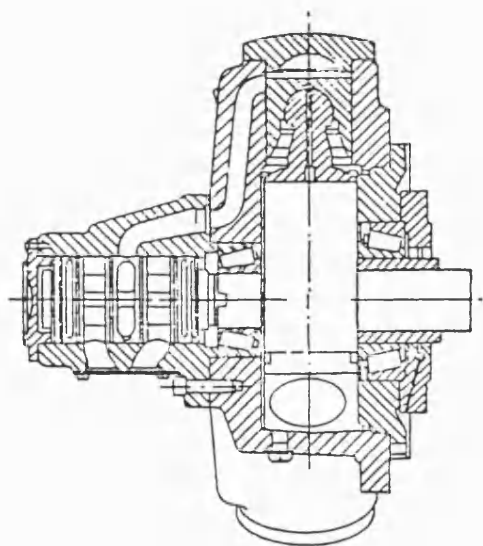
STAFFA RADIAL PISTON ECCENTRIC MOTOR
